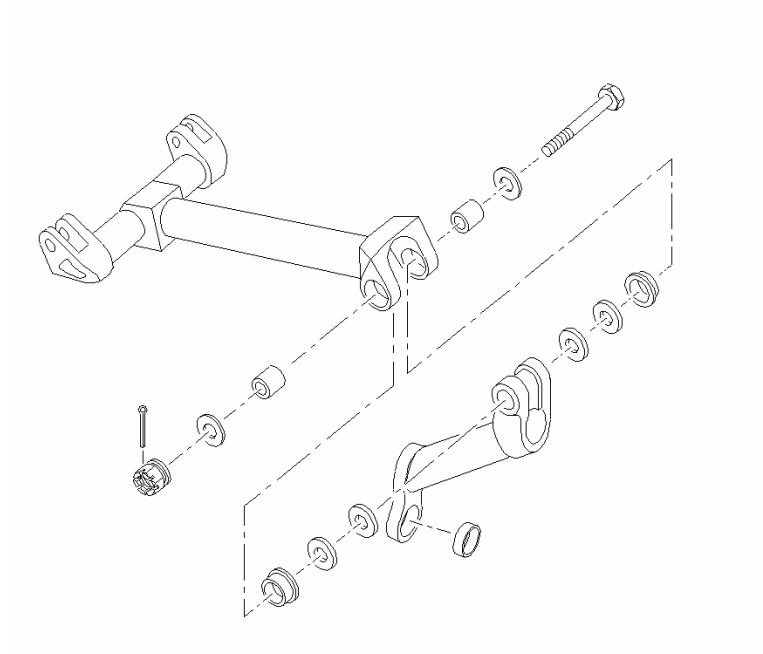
Flight Control Arm Assembly (AH-64A/D)
